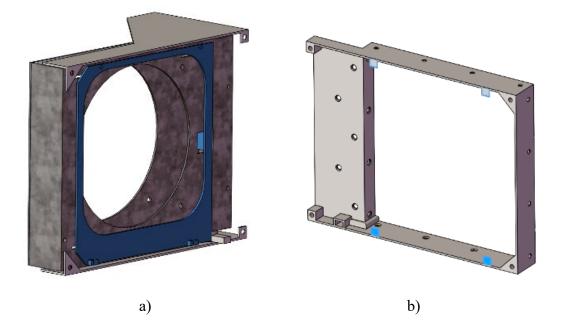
Locking Mechanism showing the a) locking plate and b) receiving tabs on the mounting bracket.
